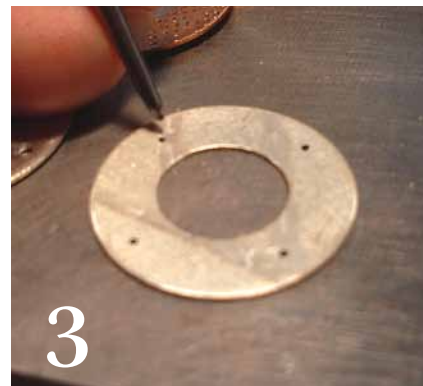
Using a centerpunch, whack 4 drilling divots into each of 12 circles at 12, 3, 6, and 9 o'clock. I marked mine 4mm in from edge of circle. Use #55 drill bit to drill each hole, keeping drill perpendicular to sheet. Sand or file any burrs.
